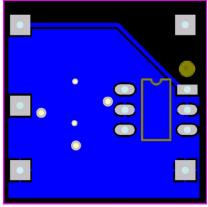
Bottom, PCB Layout for SC70-6 (board size: 1 inch x 1 inch)
